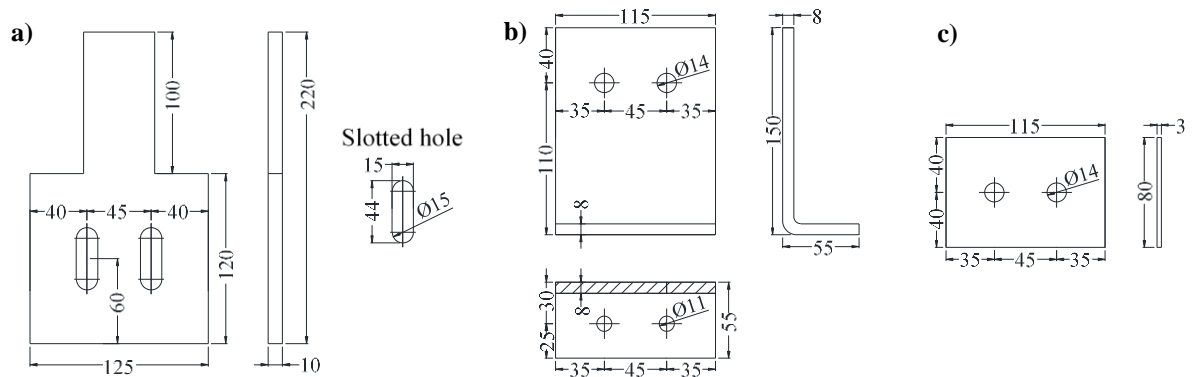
Components for the tests of the friction devices (FDs). (a) Internal plate with slotted holes; (b) external plate and (c) brass plate. (dimensions in mm)
